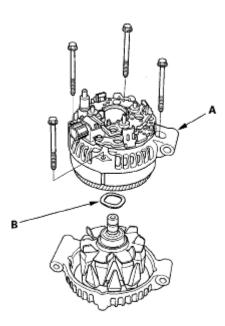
Identifying Rear Housing Assembly And Washer Bolts
